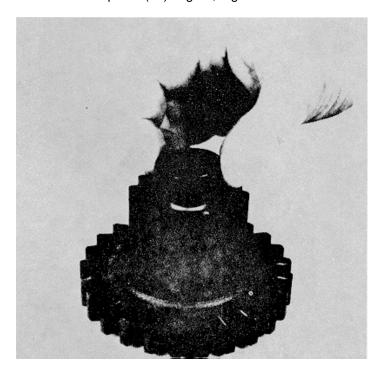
B-22. Installing Spacer E. Load second row of 19 bearings (16) around load pin, Figure 11 B-23.
